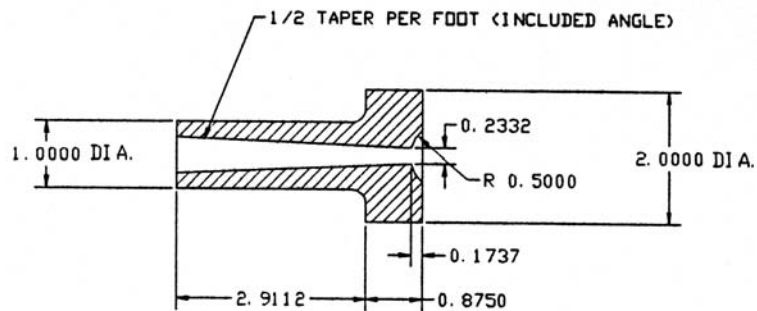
Section view of the sprue bushing showing the taper of the sprue opening. All dimensions are in inches.
